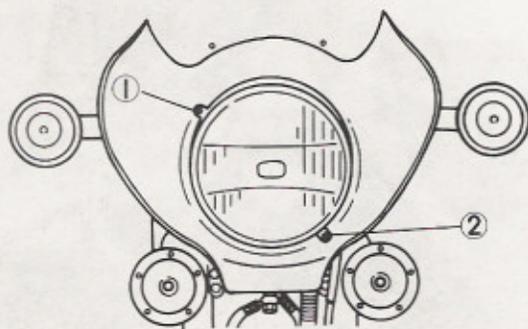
Location of headlamp beam adjusting screws – RD350 LC II
